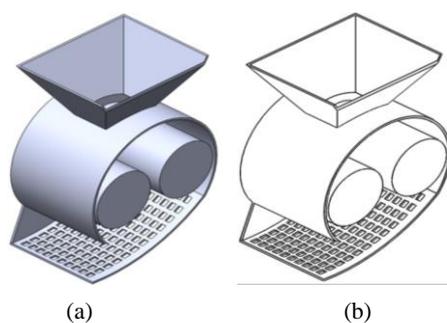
Cylindrical rollers applied in cocoa pod crushing mechanism.
